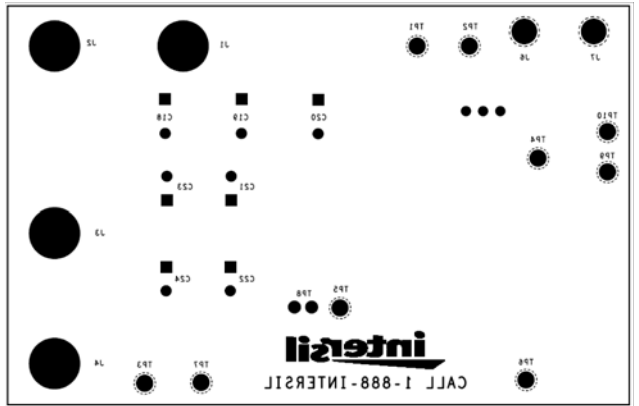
ISL8104EVAL1Z - BOTTOM LAYER (SOLDER SIDE)
